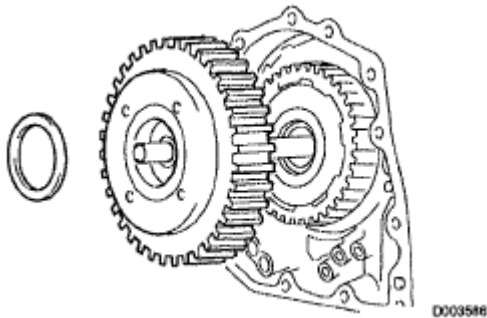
Installing Direct Clutch Assembly And Thrust Bearing To Rear Planetary Sun Gear Assembly
